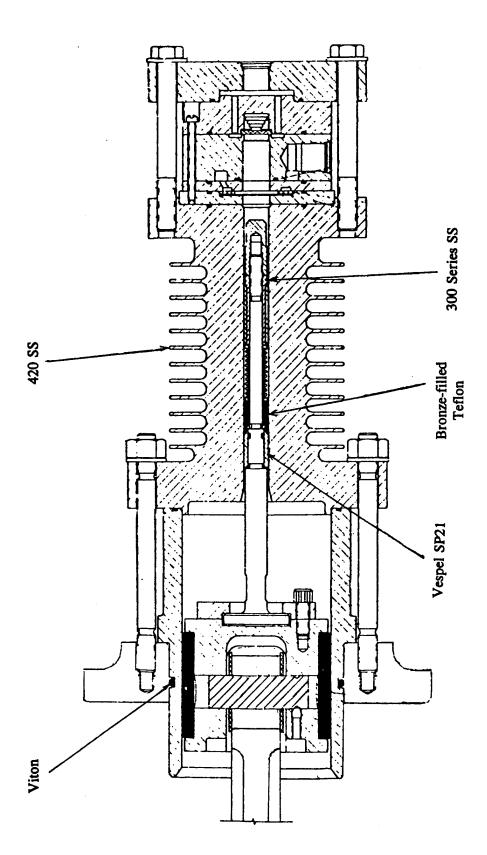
High-Pressure Cylinder of Oxygen Compressor
